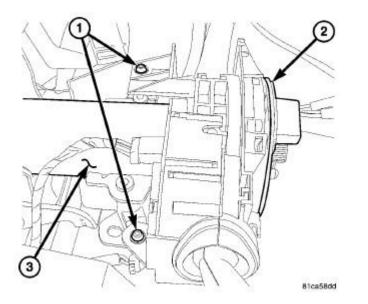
Identifying SCCM Upper Mounting Screws Courtesy of CHRYSLER LLC
